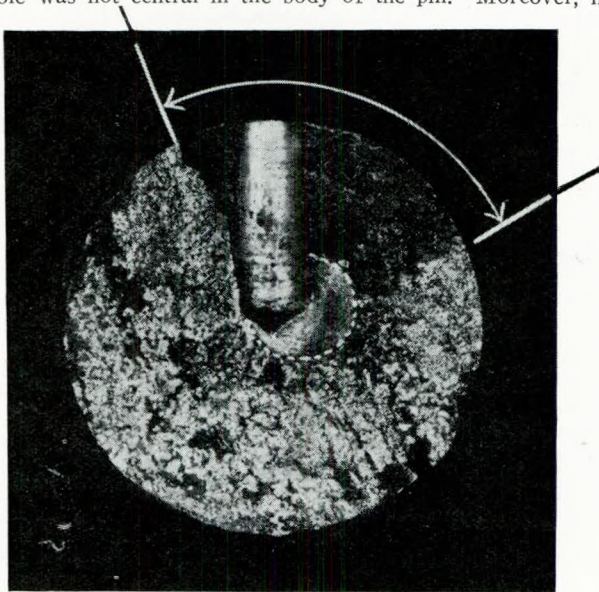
Fractured surface of pin, showing extent of original crack. The photograph also shows the end of the longitudinal oil hole.
